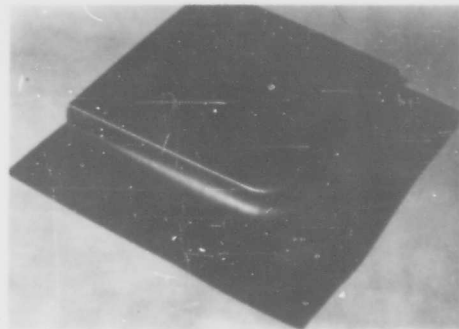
TZM Heat Shield Corner Blank Formed in First Step Forming Operation
